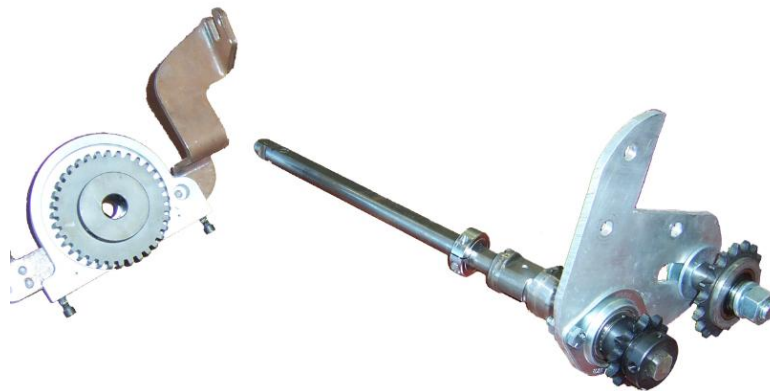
Servomotor Mounting Bracket and Shaft (courtesy of Matt Wills)
